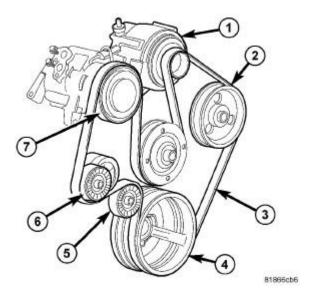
ACCESSORY DRIVE BELT ROUTING 3.7L/4.7L Courtesy of CHRYSLER LLC
